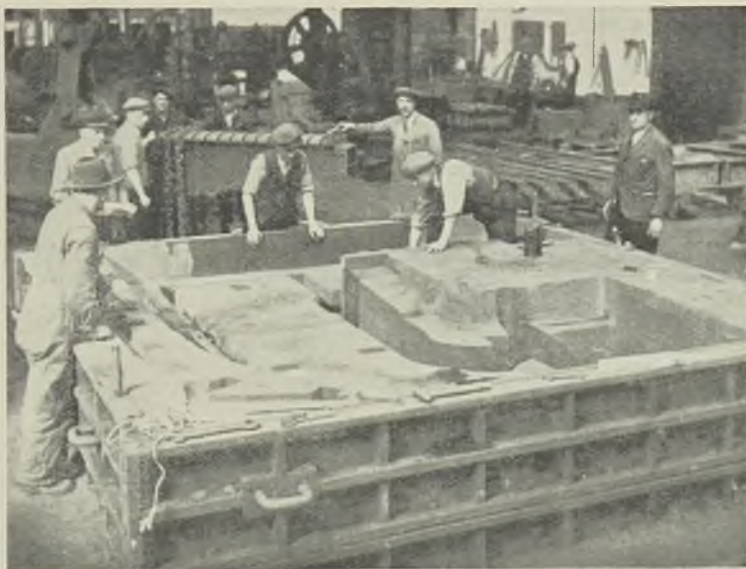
CORES BEING ASSEMBLED IN THE MOULD.
